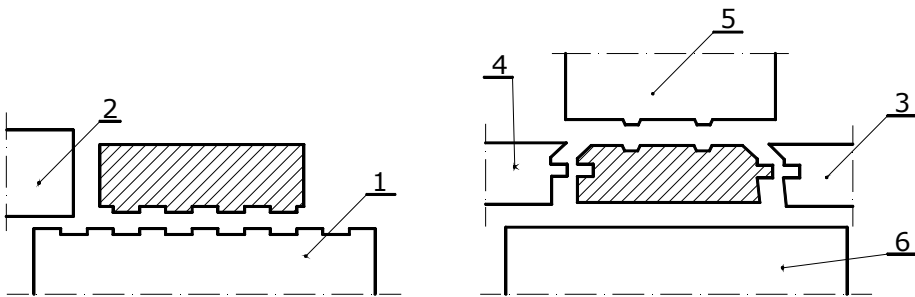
Way of making bottom and top surfaces as well as sides of woodblocks on the U23 four-side planing machine: 1, 2 – heads forming bases, 3 – tongue-forming cutter, 4 – profile cutter forming the groove, 5 – head forming the bottom part, 6 – head forming the top part
